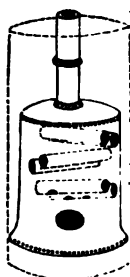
Explosion of a vertical boiler from fractured cross-tube.
